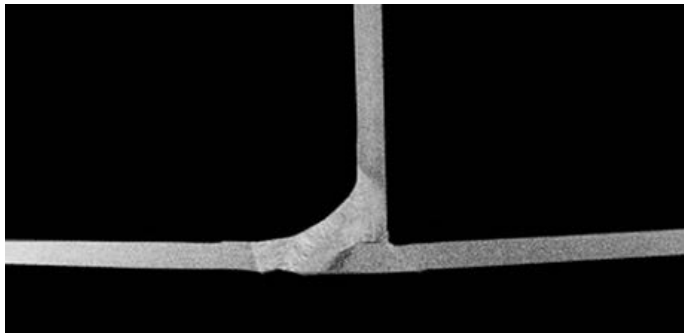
Example of fillet weld root concavity with the horizontal element undercut in a T-joint
